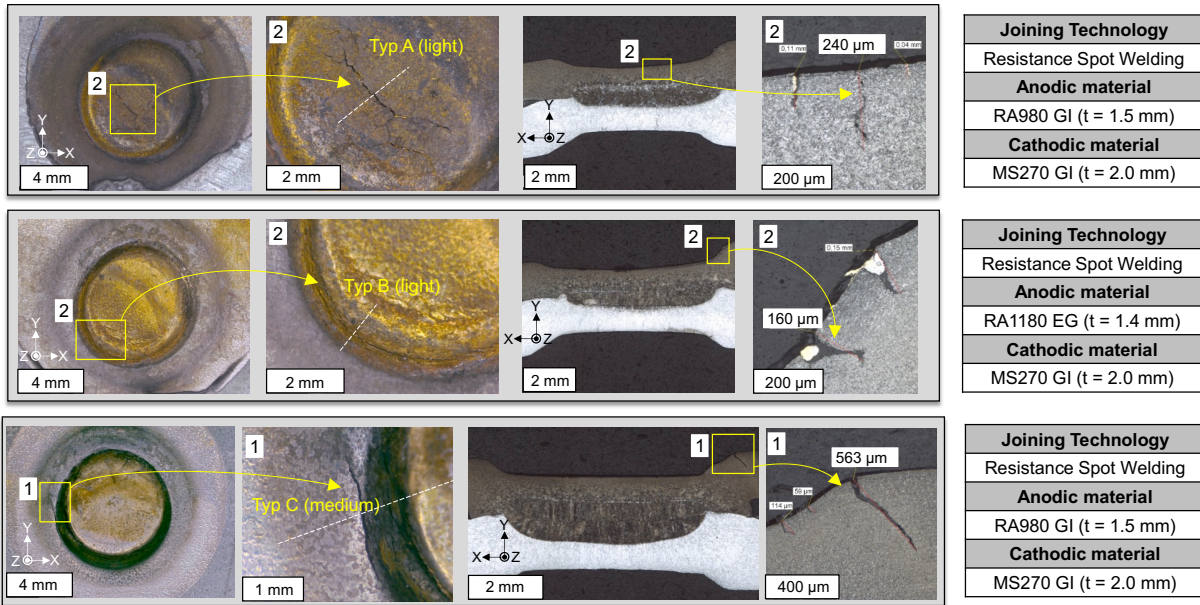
Measurement of crack depth at similar crack severity in crash test samples (A, B, and C-type cracks from top to bottom)
